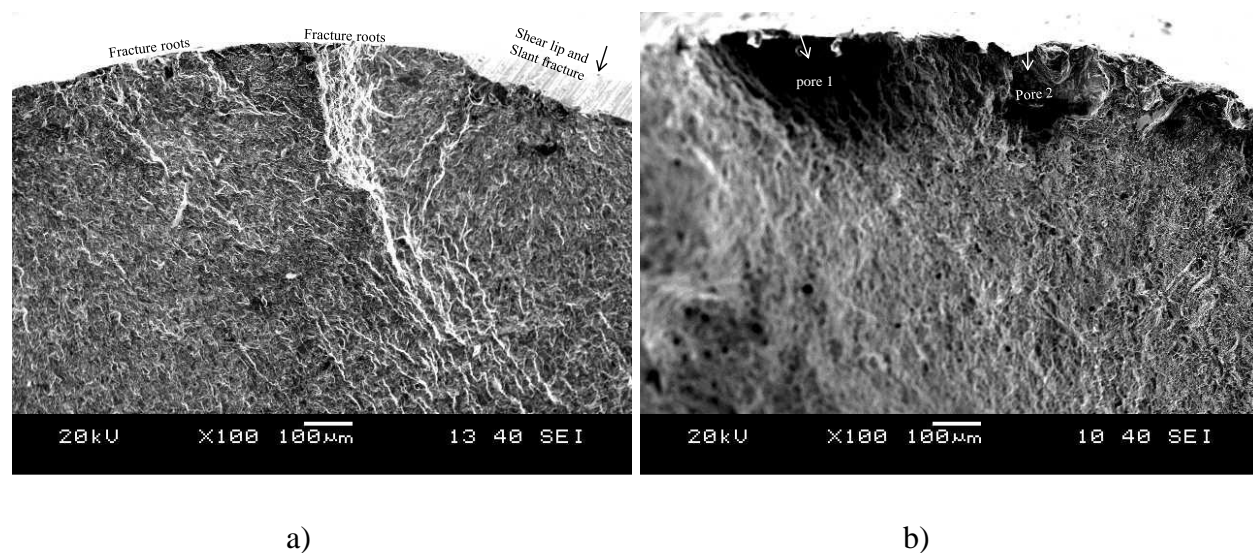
End view of surface crack initiation and propagation of INCONEL601. a) slant tensile fracture surface, and b) surface pore as fatigue fracture origin. Crack propagation direction from top to bottom
